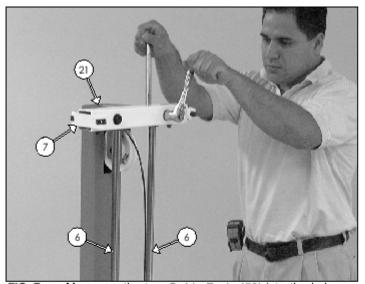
Maneuver the two Guide Rods (#6) into the holes on the bottom side of the Guide Rod Retainer (#7).
